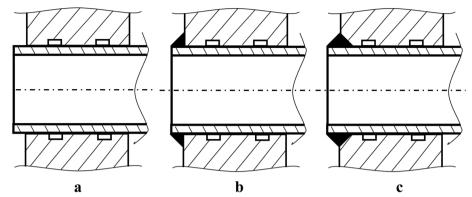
Tube-to-Tubesheet welds. a Expanded TTS joint. b Seal welded TTS joint. c Strength welded TTS joint
